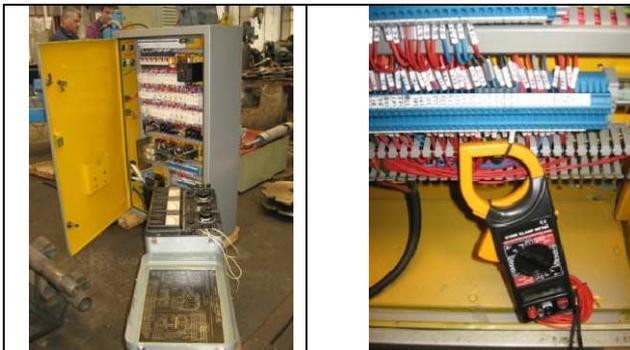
Measurement of the electrical power consumed by the machine tool.
